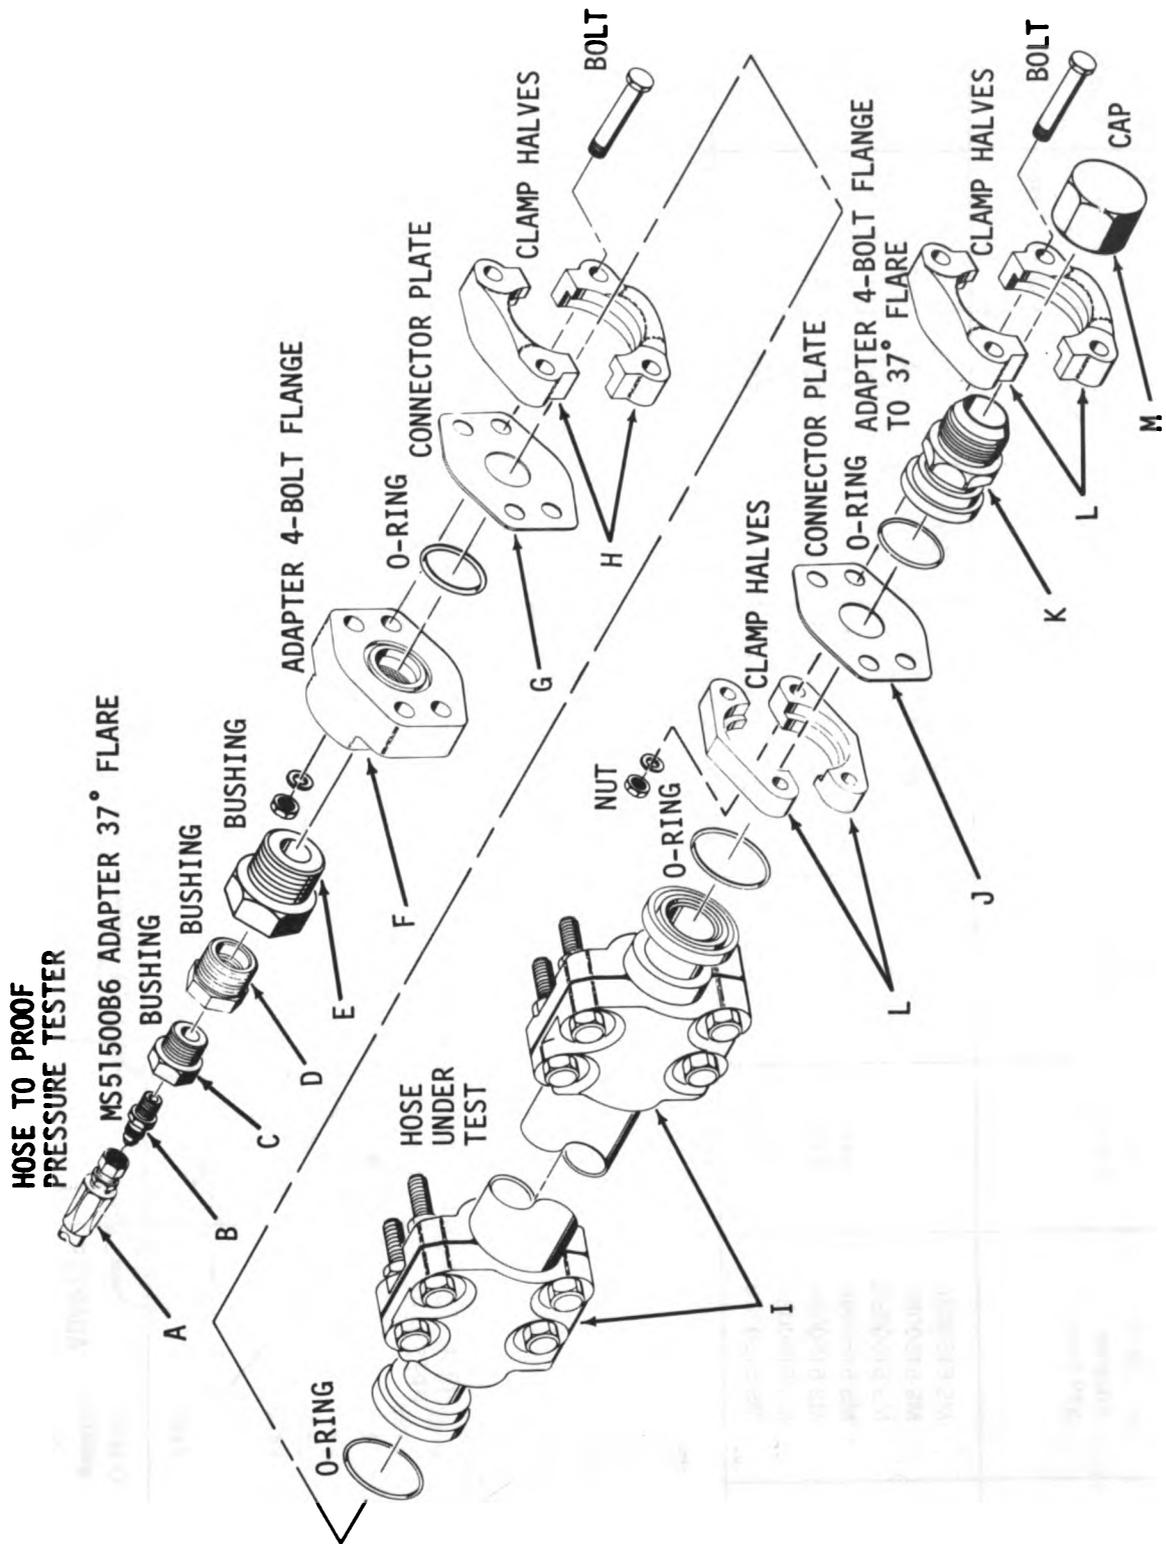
Adapting a 4-Bolt Split Flange Hose Assembly to the Proof Pressure Tester.
